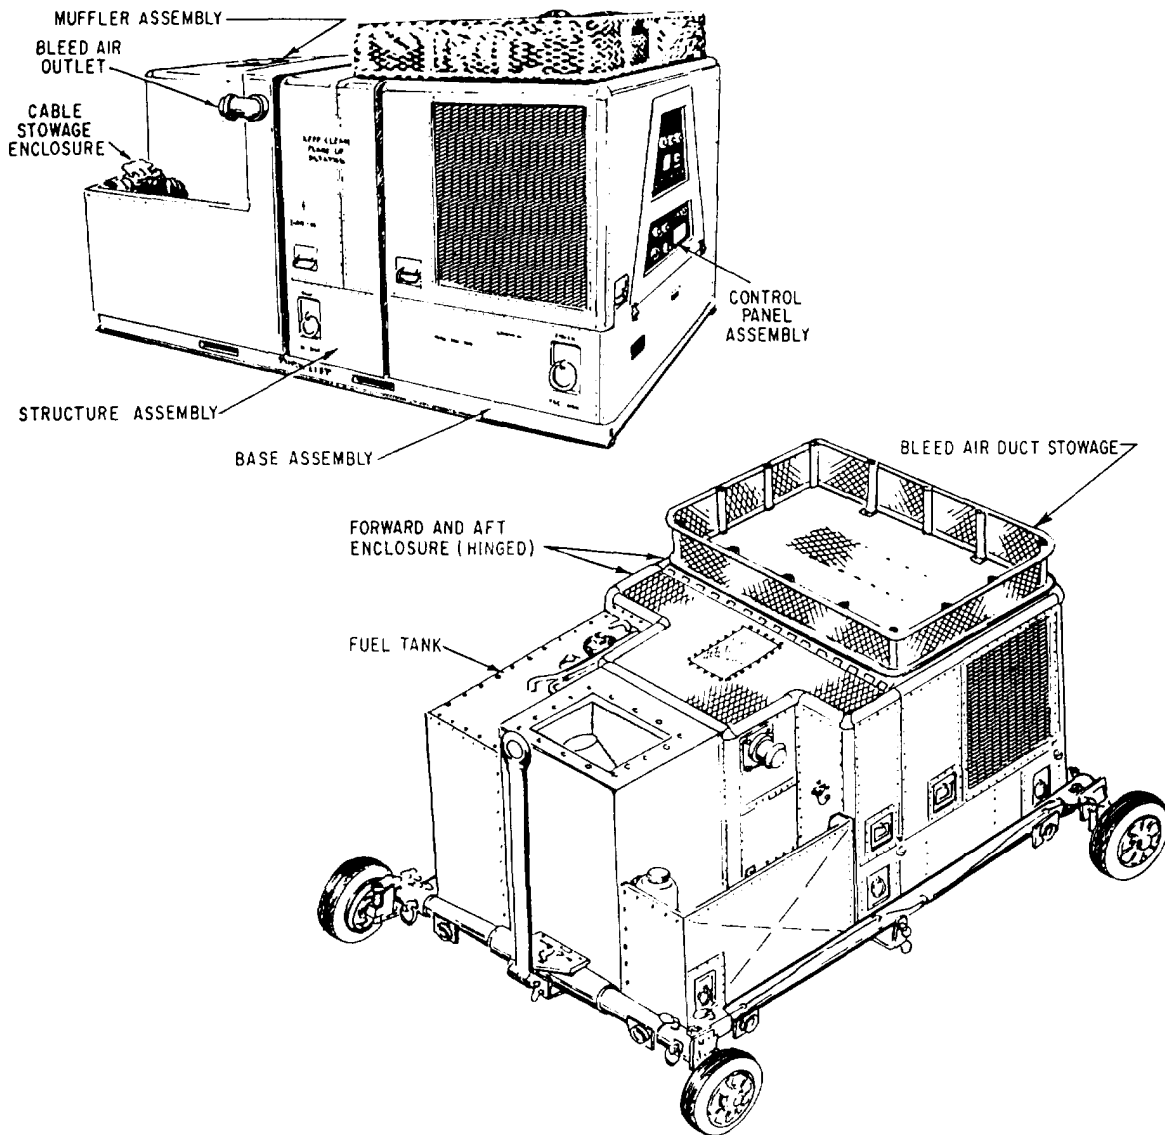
Model NCPP-105 gas turbine compressor power unit.
